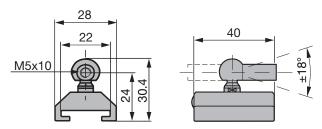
Installation dimensions of BTL5-F-2814-1S magnet
